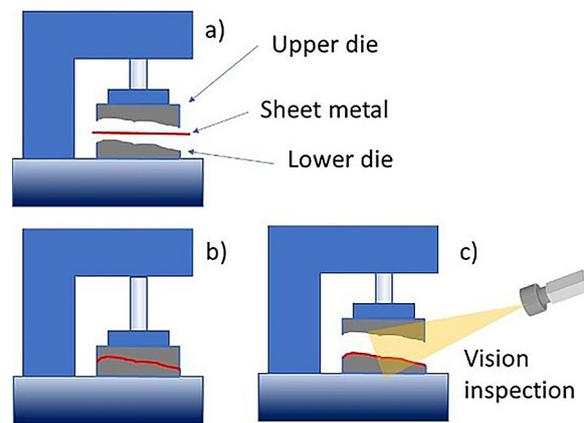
Sheet metal forming; (a) forming components, (b) the concept of the sheet metal forming inspection
